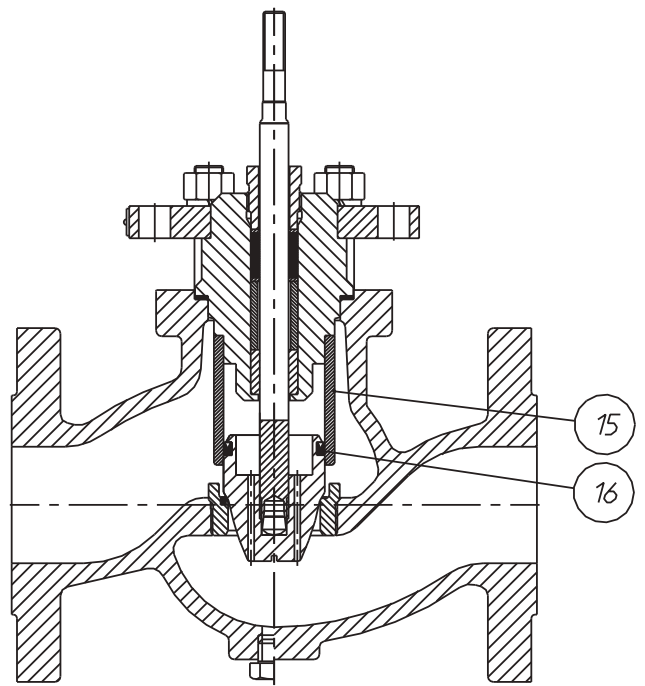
Valve Bonnets and Valve Plugs DN125...250
